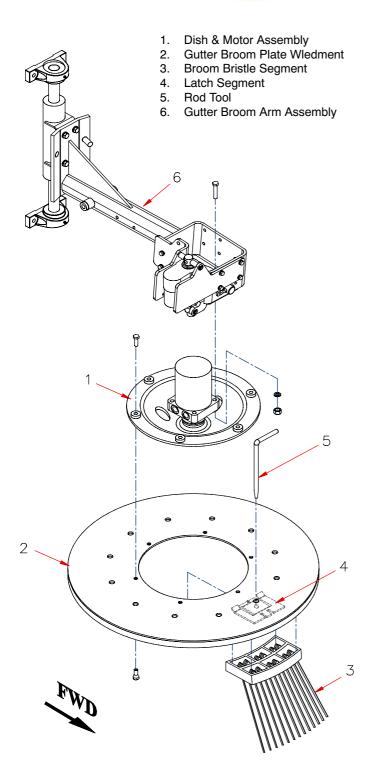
A Gutter Broom Plate/Brush Removal and Installation are basically the same on both sides.
